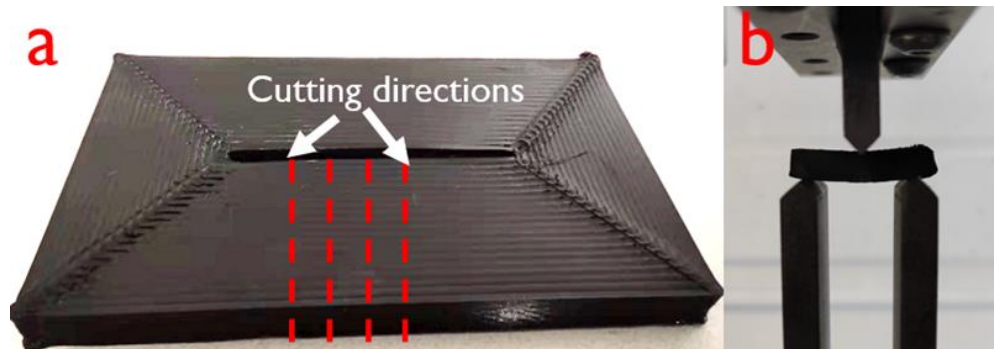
(a) Printed sample and cutting direction of flexural bar. (b) 3-point flexural test
